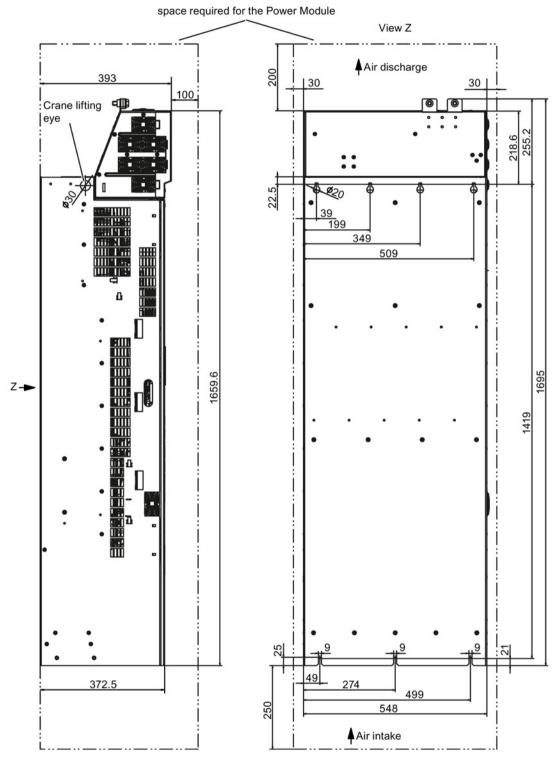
Dimension drawing of PM330 frame size HX, view from the side, view from the rear
